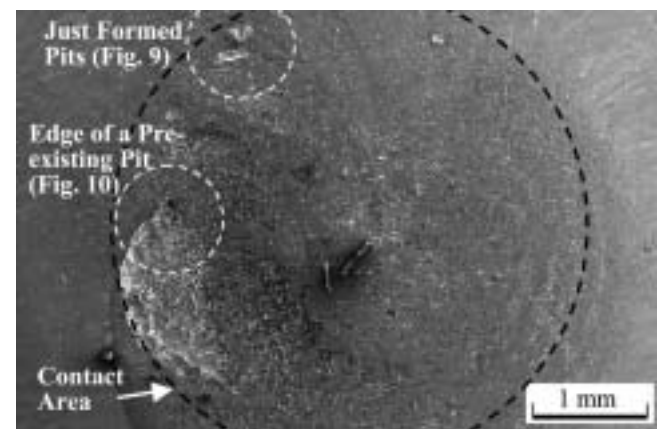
Pitting at the edge of the contact area on an electrode after 96 welds.
